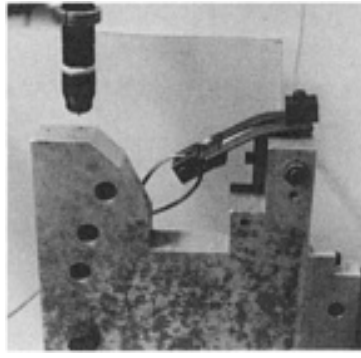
PHOTO OF A TYPICAL SUBSCALE VARESTRAINT TEST APPARATUS. SOURCE: REF 11
